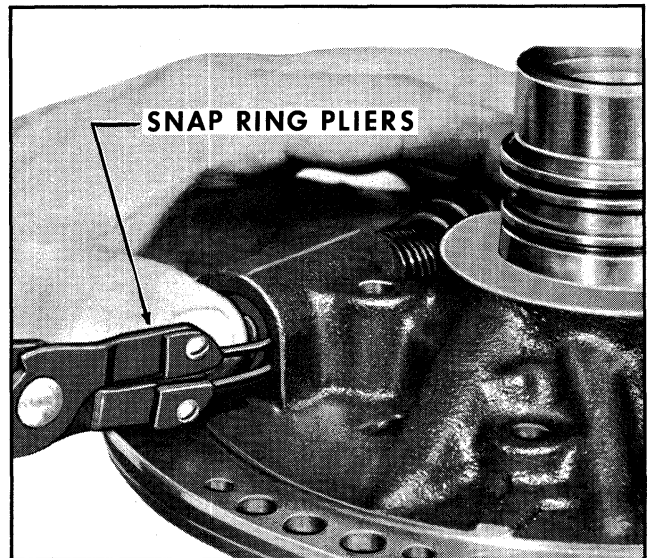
B-102 Removing Boost Valve Sleeve Snap Ring
